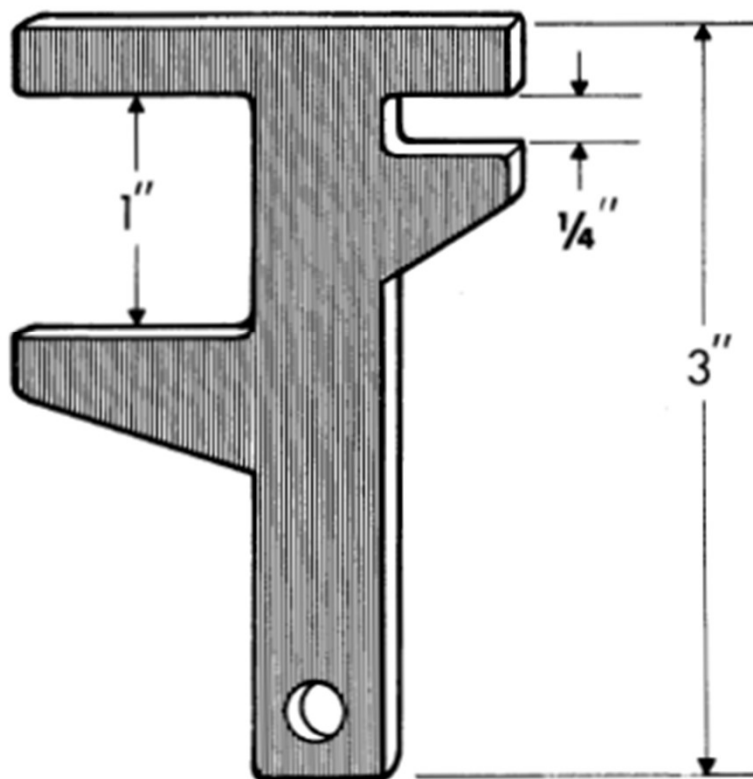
A Go-No-Go gage can be cut from 1/16 or 1/8-inch sheet aluminum. Cut the notches slightly tight and file smooth to final dimensions.
